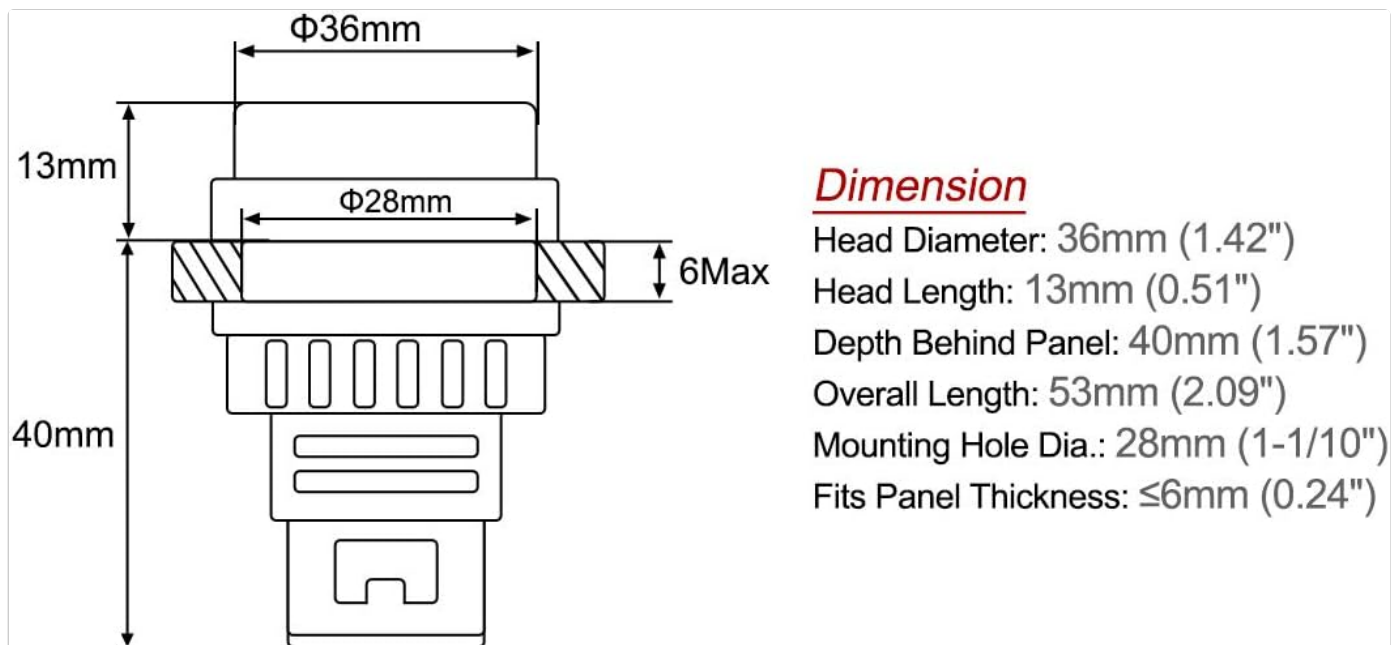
Technical drawing illustrating all key dimensions and panel thickness compatibility.
